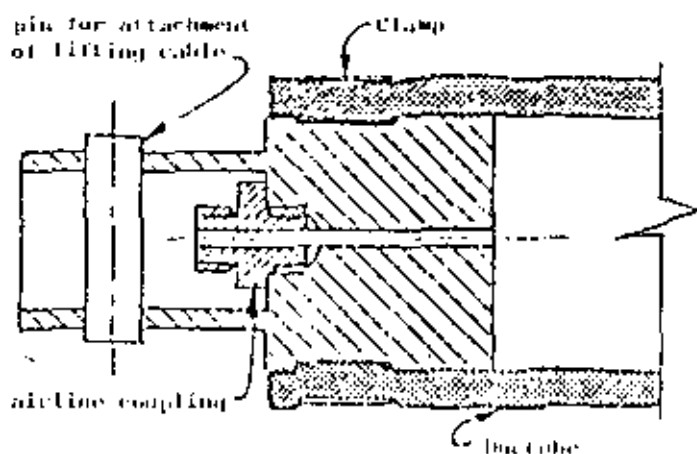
Section through the end of a packer for sealing the bottom end of a pumping test cavity. The upper packer end has additional longitudinal fittings for pressure inlet and pressure outlet cables.
